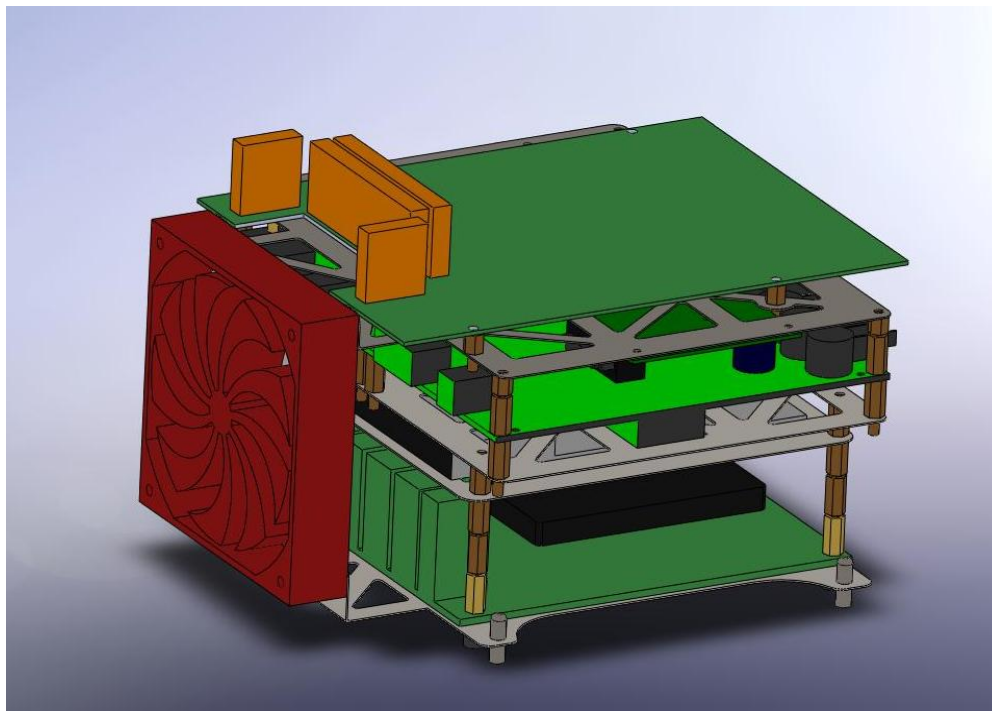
The SolidWorks design of the electronics stack with 120mm fan (red)
